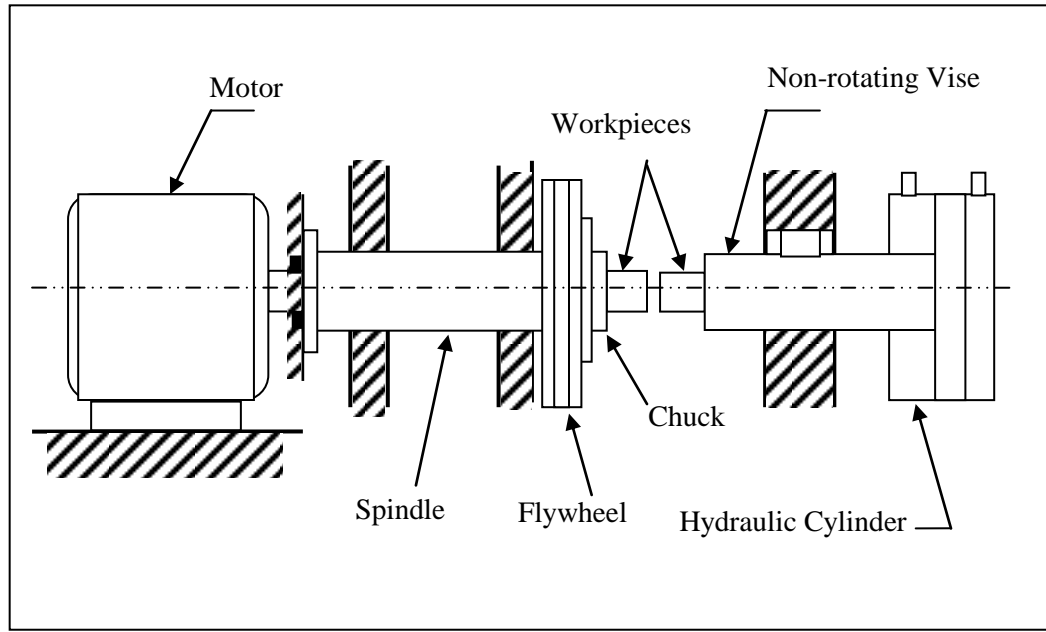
Basic arrangement of an inertia-welding machine (Izadi, 2008)
